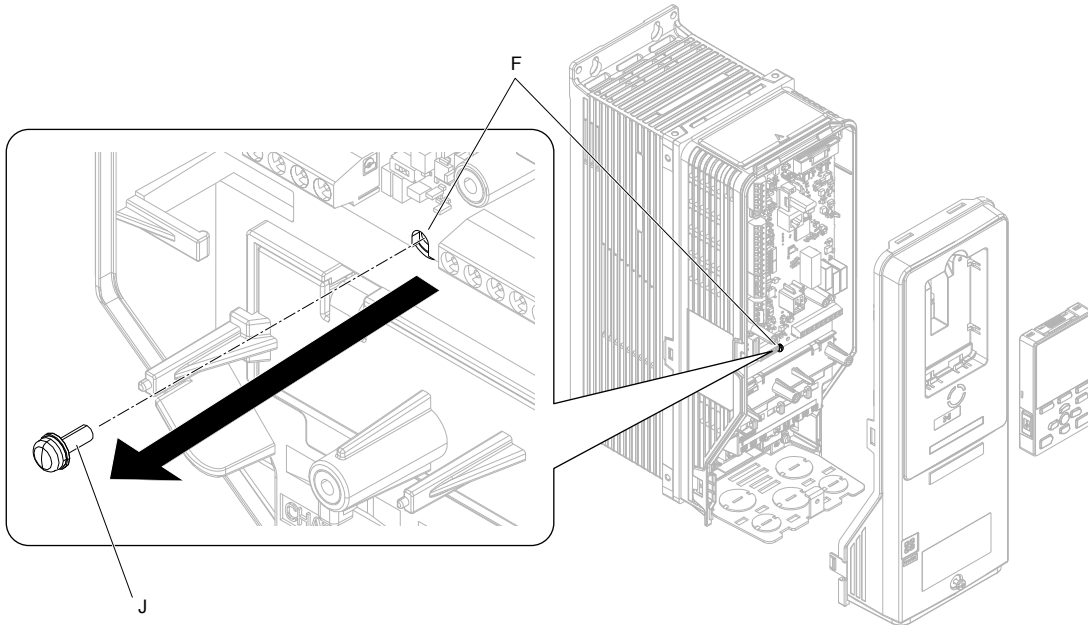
Remove the Screw from the Drive Grounding Terminal
